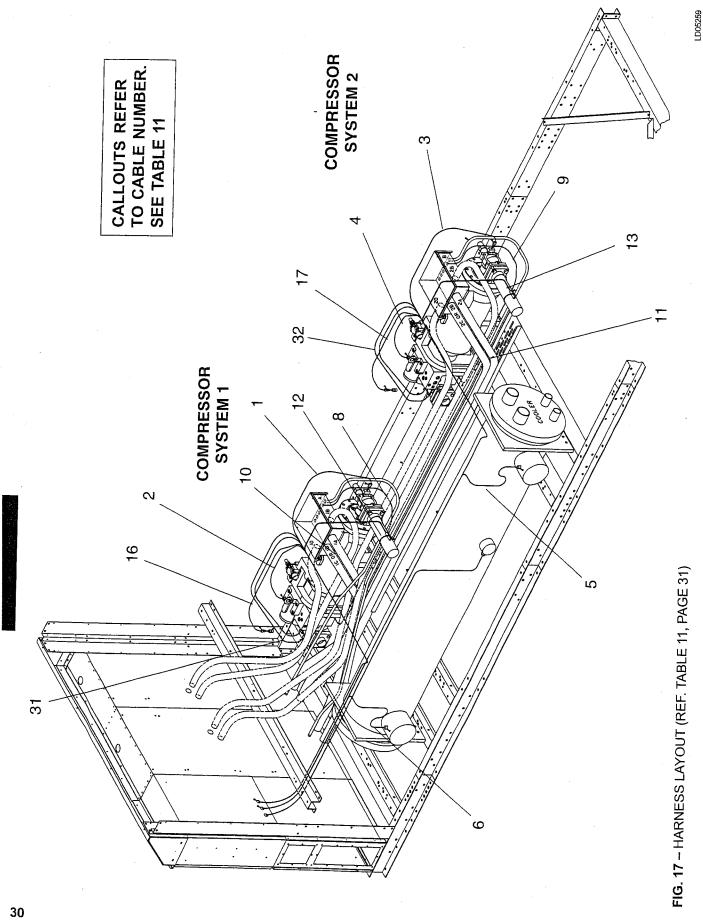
HARNESS LAYOUT (REF. TABLE 11, PAGE 31)
